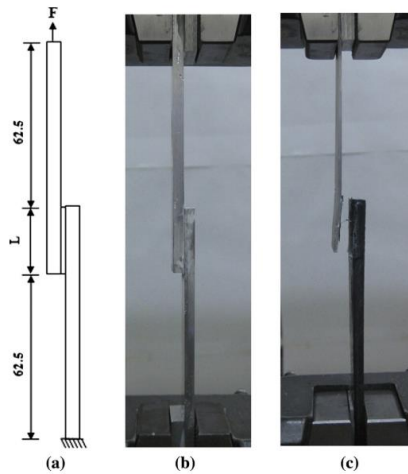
Single lap joint shear test; (a) the boundary conditions, (b) the loading, and (c) the joint failure. (Ozel, 2014)
